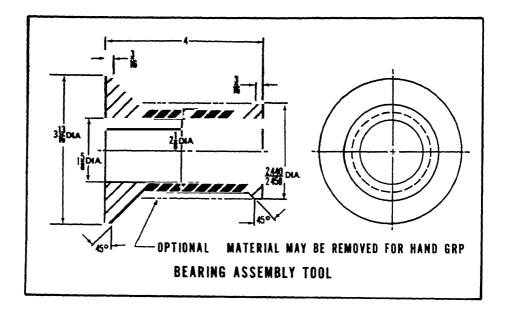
Low Carbon Steel Bar 3-7/8 in diameter x 4 in long
